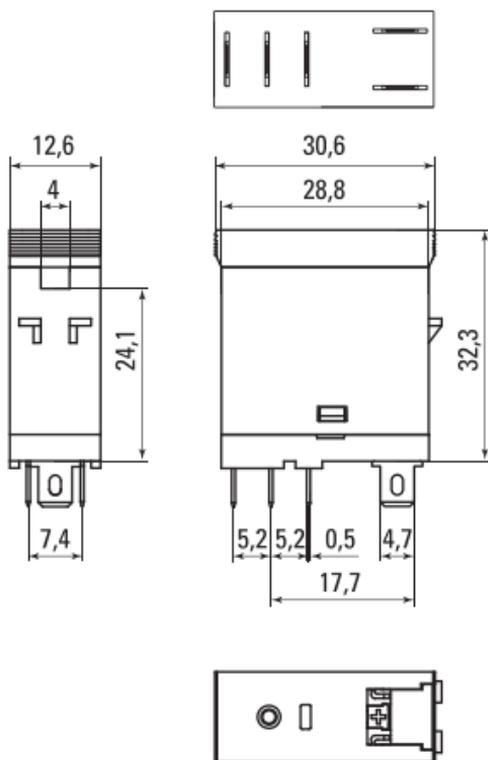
Overall dimensions of interface relay RPA(t) 25/1
